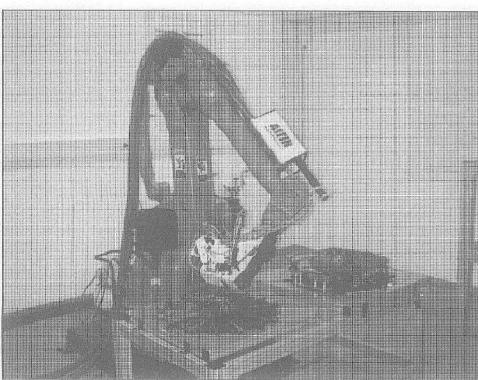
ALTIN Robot controlled one side sewing machine for parts of cap and blades with cap
